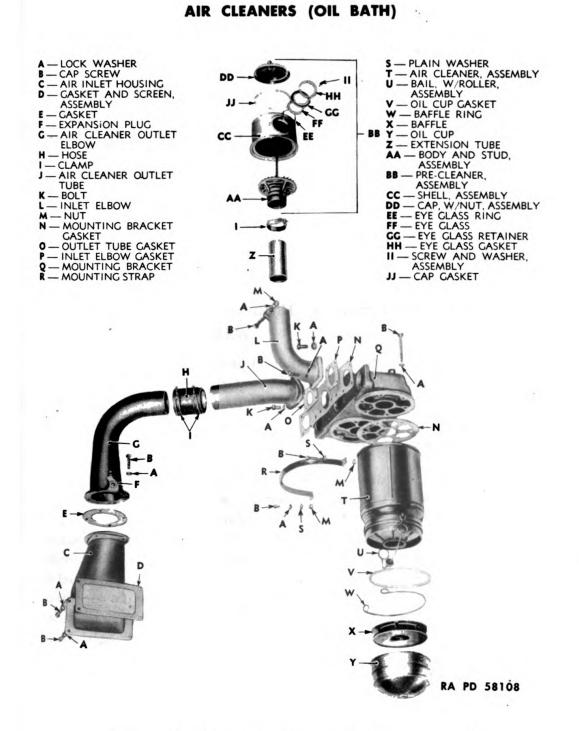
Exploded View of Air Cleaner and Pre-cleaner Assembly
